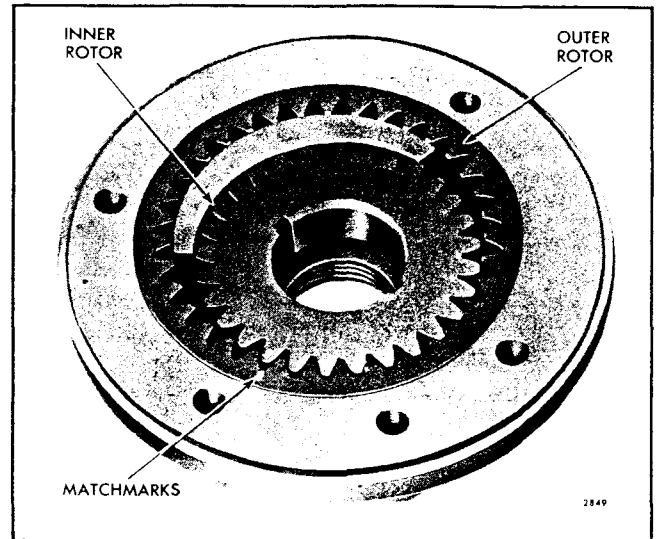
Location of Matchmarks on Inner and Outer Oil Pump Rotors (Gears)
